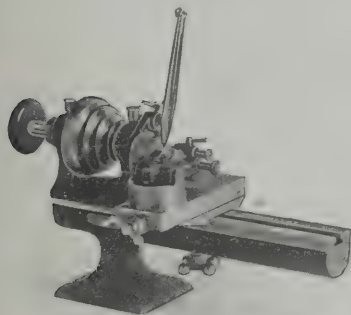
Special Grinding Lathe with Self-contained Measuring Indicator
